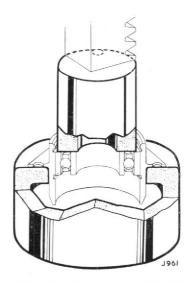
Pot fixture T.74757 and adapter T.74752, for removing lower bearing from lower driving gear bearing housing.
